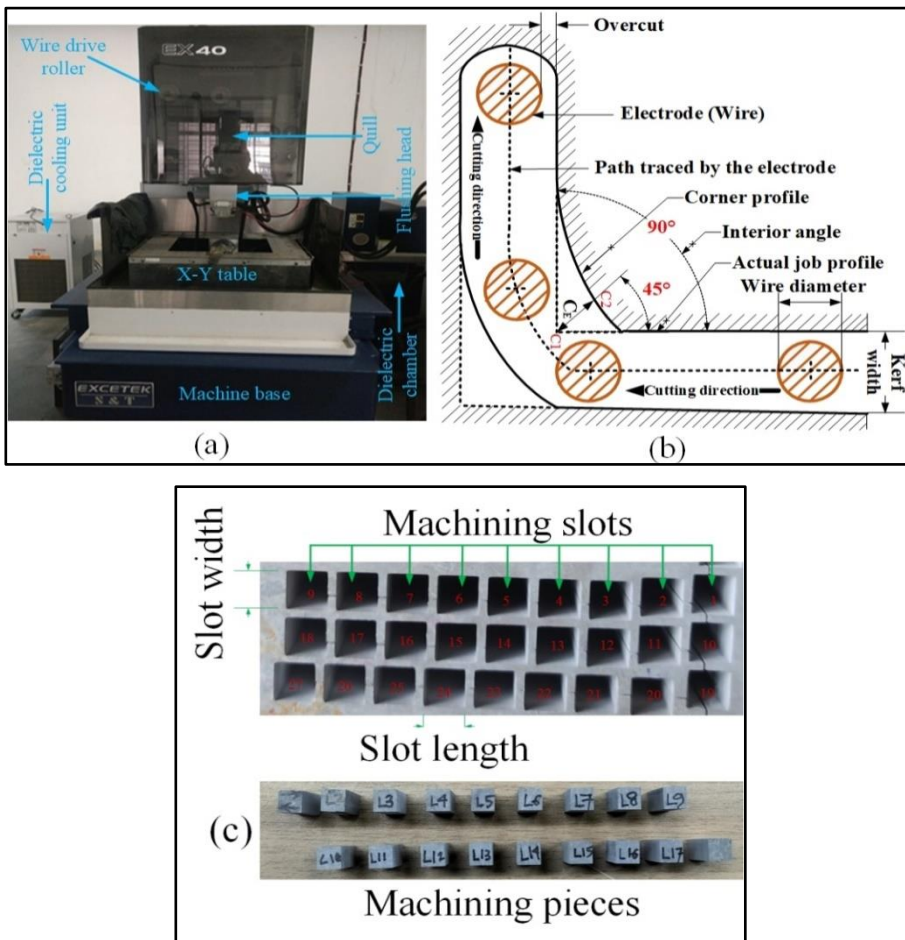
(a) Experimental setup and (b) Profile produced by WEDM (c) Workpiece and slot produced after WEDM
